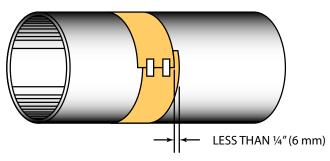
PAPER TEMPLATE ALIGNMENT
